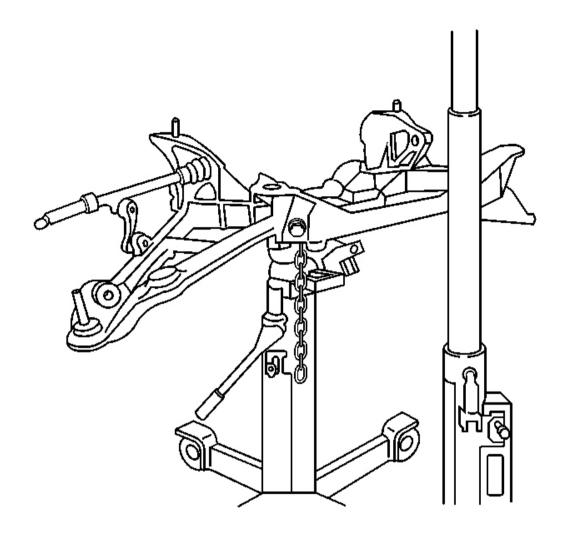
Supporting Crossmember On Jack Courtesy of GENERAL MOTORS CORP.
